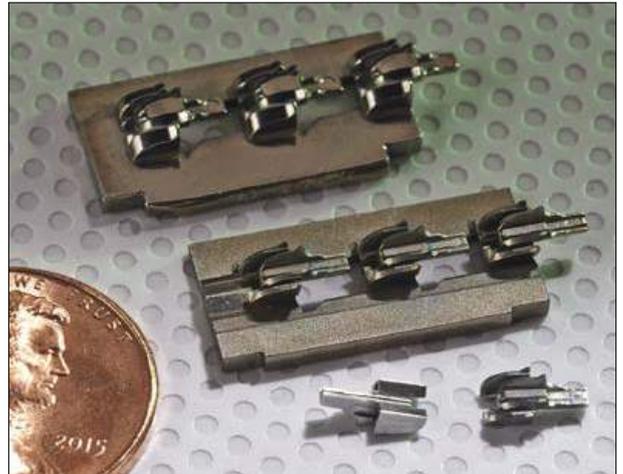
Advanced Forming Technology produced these MIM wedge blanks used in an endoscopic staple gun
